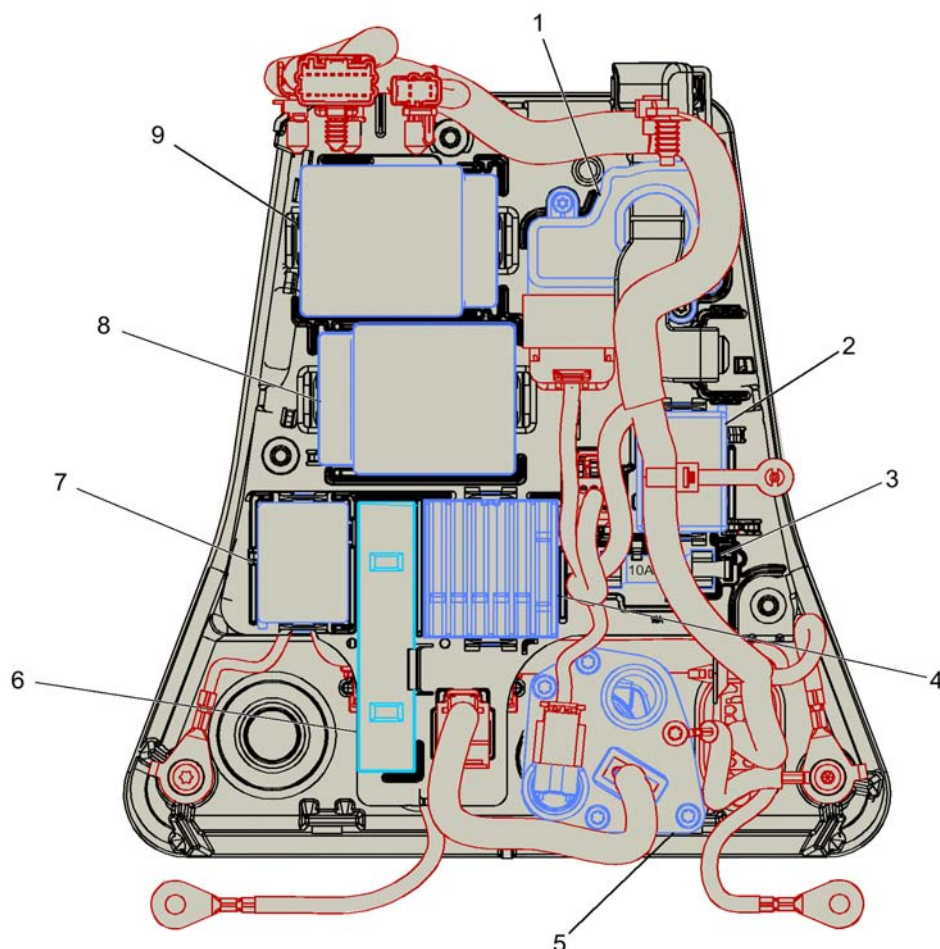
Underbody - Hybrid/EV Battery Pack Contactor Assembly Components
